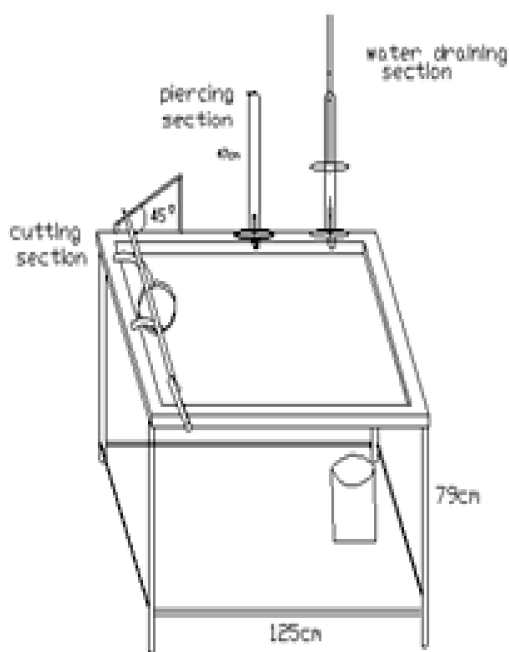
An Isometric view of the equipment (Dimensions in cm)
